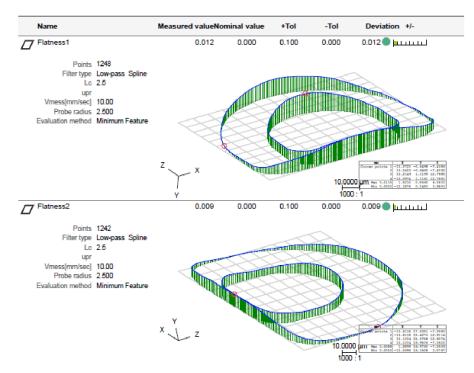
CMM deviations of seal surfaces; CAD vs real part
